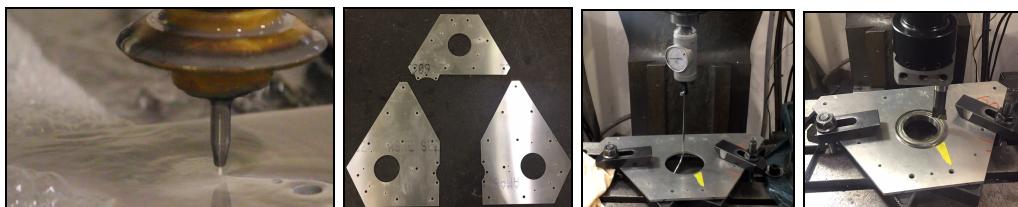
View of Waterjet Cutting Gusset Plates (Left), Plates Post Waterjet Cutting (Right).
